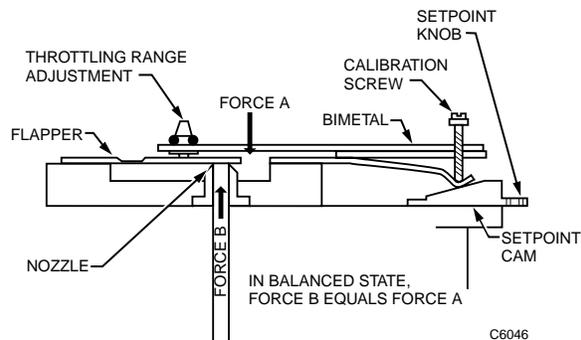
Flapper-Nozzle-Bimetal Assembly.
